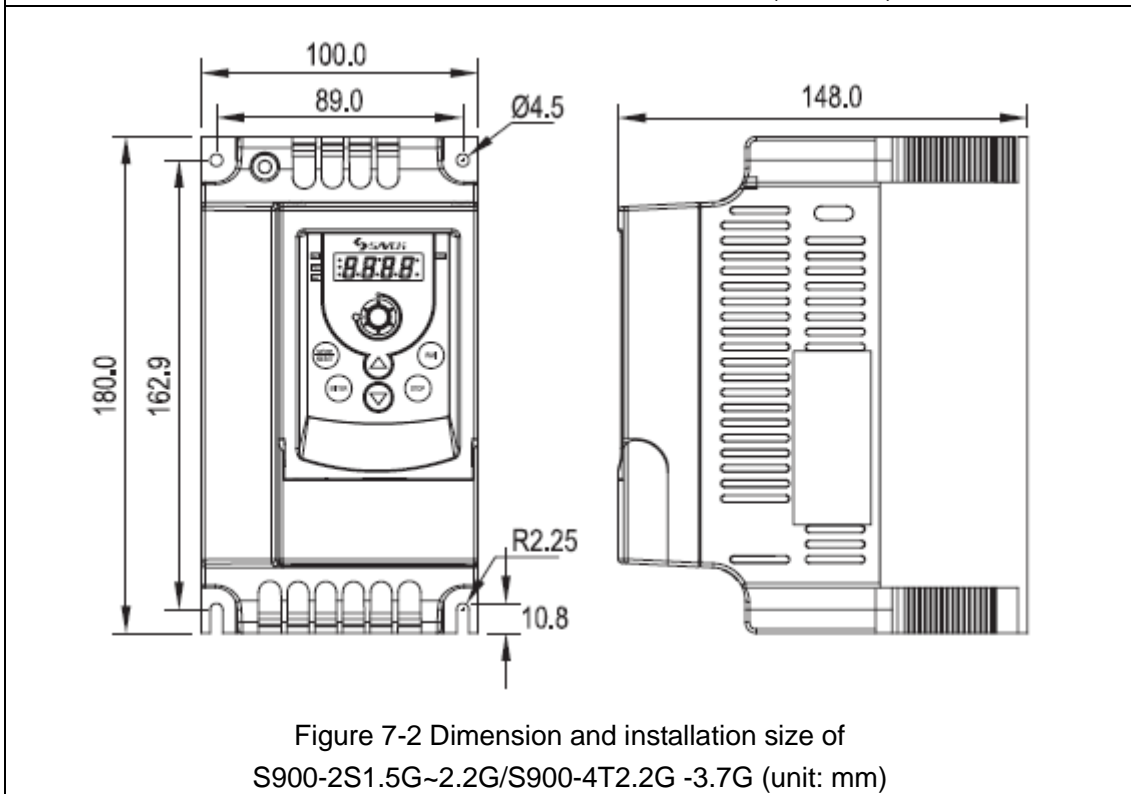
Dimension and installation size of S900-2S1.5G~2.2G/S900-4T2.2G -3.7G (unit: mm)
